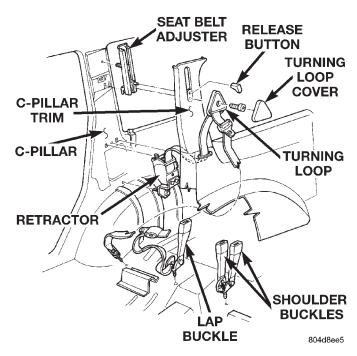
Rear Seat Shoulder/Lap Belts & Buckles
